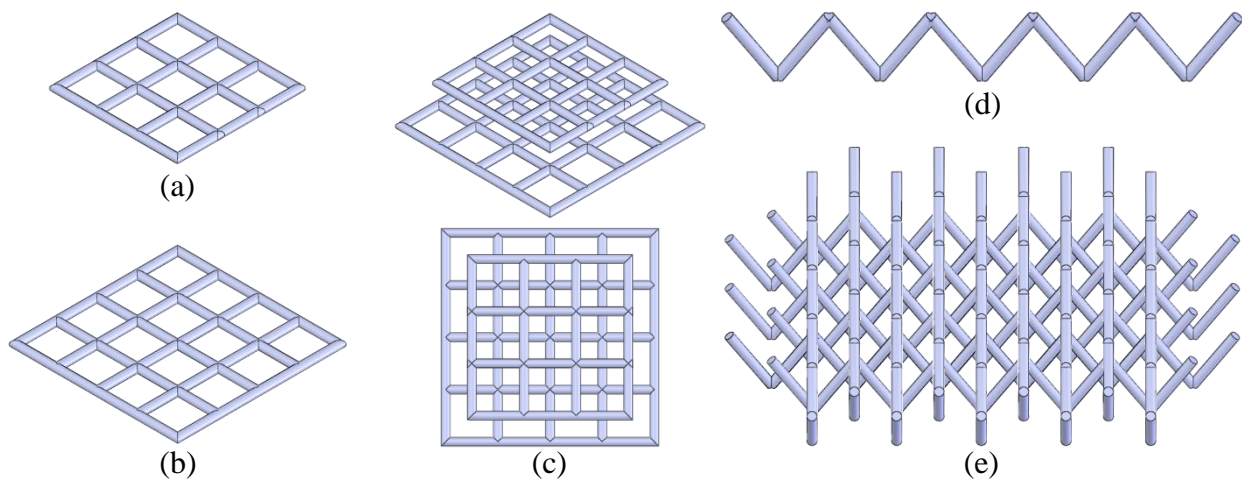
CLS construction: (a) top section, (b) bottom section, (c) top and bottom section alignment, (d) single row of connective trusses, and (e) orthogonal arrangement of connective truss rows.
